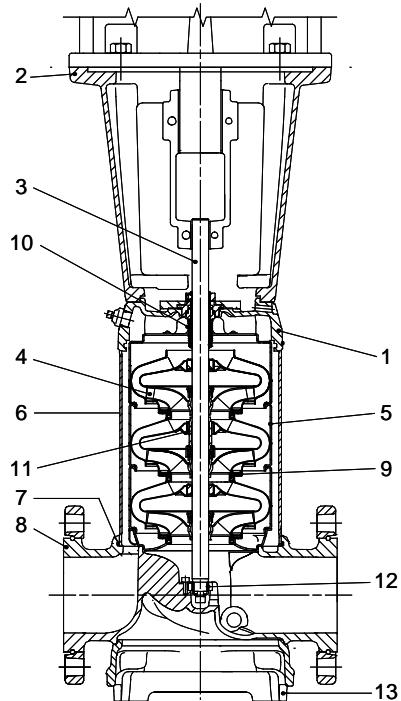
Sectional drawing of a CR(N) 45, 64 pump
